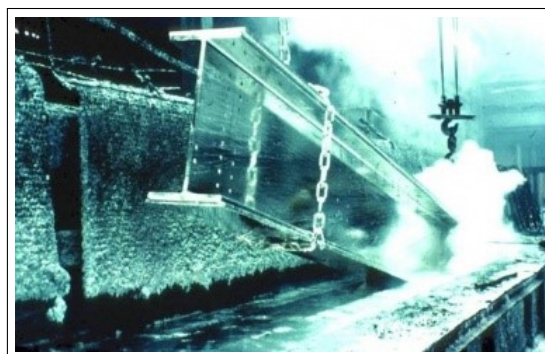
Hot-rolled I-section withdrawn from a typical hot-dip galvanizing bath (Steelconstruction.info, 2015a)
